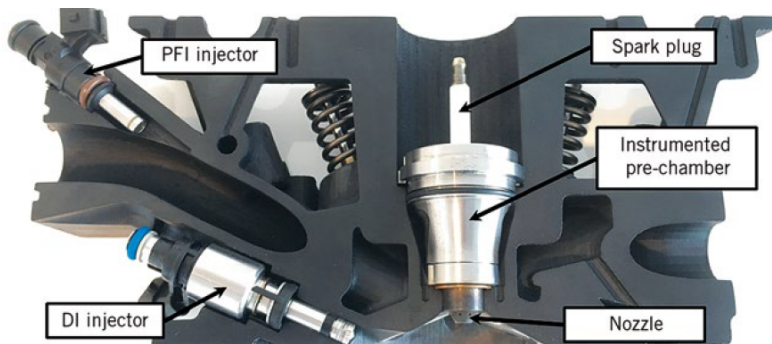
Cylinder head assembly of the MAHLE passive jet ignition system [122].
